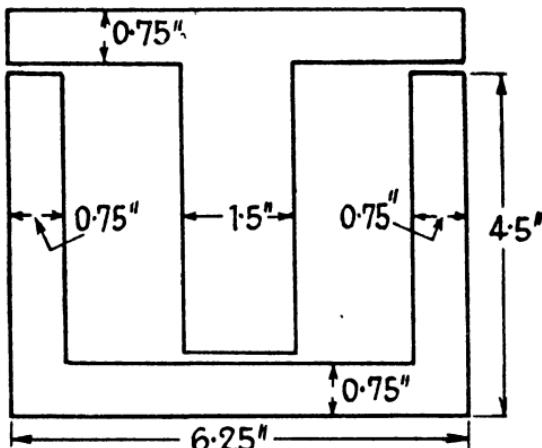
STAMPING USED IN WORKED EXAMPLE
